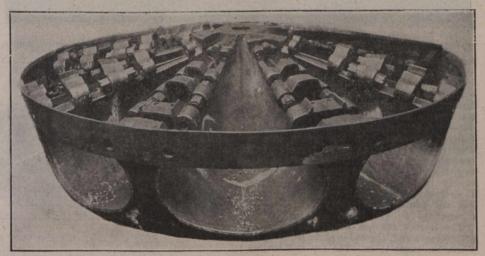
Assembled Cutter Head of New C.P.R. Snow Plow, Without Cutters.
